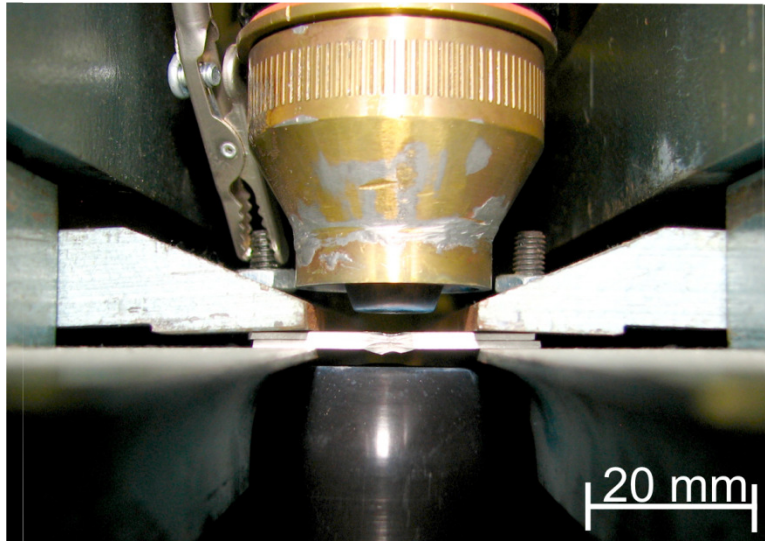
Clamping bar securing a specimen between the two PAW torches.
